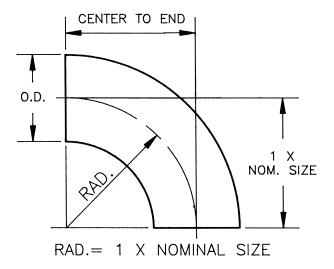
Center-to-end dimension of the short-radius elbow.
